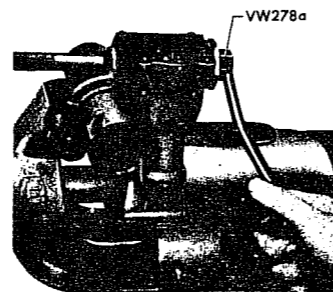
Unscrewing the worm spindle axial play adjustment screw.
